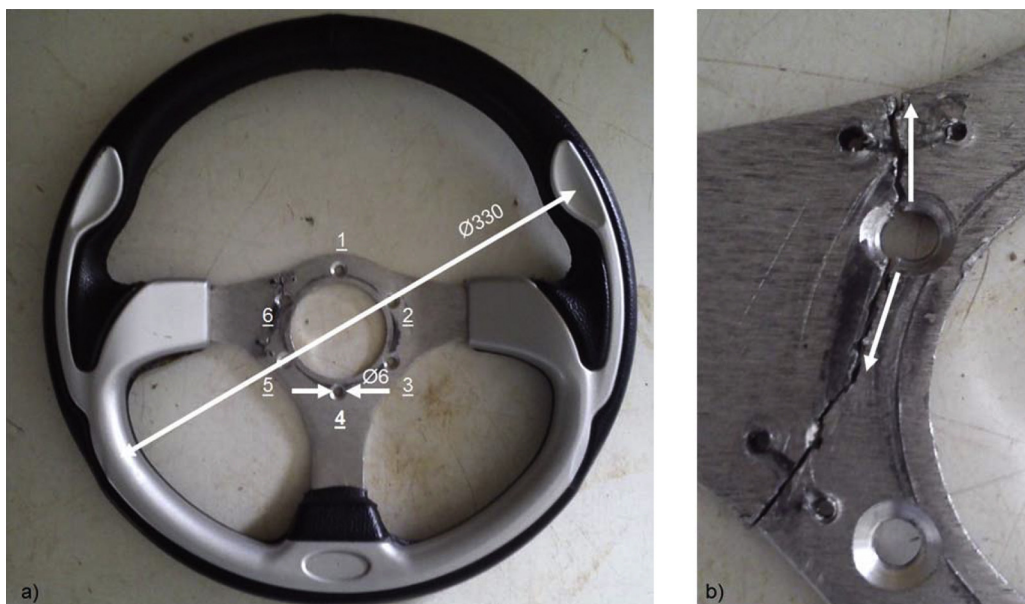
(a) Cracked steering wheel with dimensions in mm. (b) Detail of the fastener hole with cracks; arrows showing direction of crack growth.
